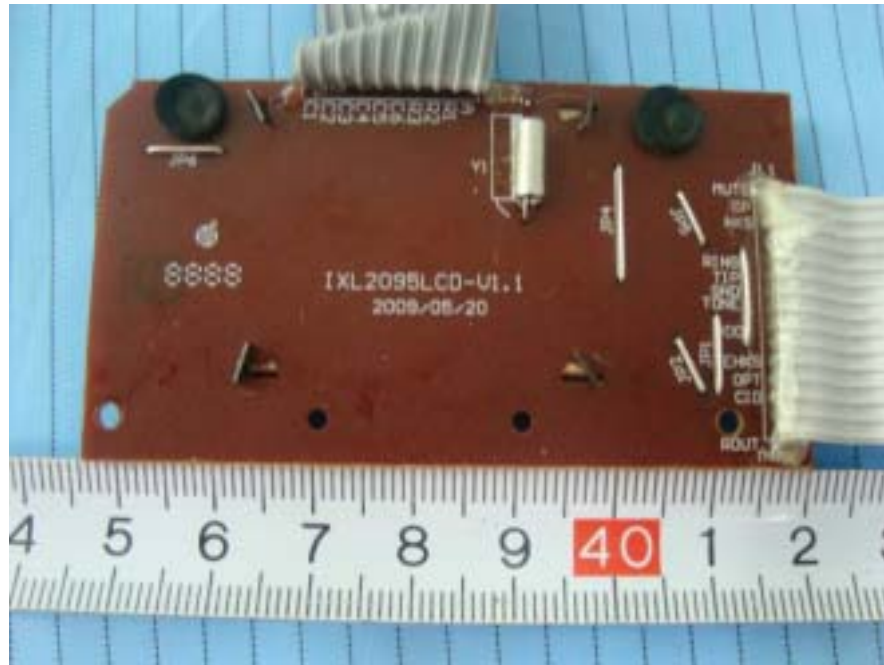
EXHIBIT C - TEST SETUP PHOTOGRAPHS
